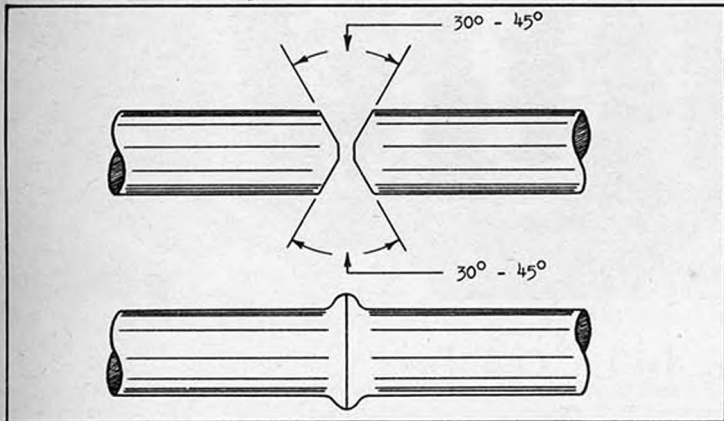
Butt Weld -- Ends Ground
